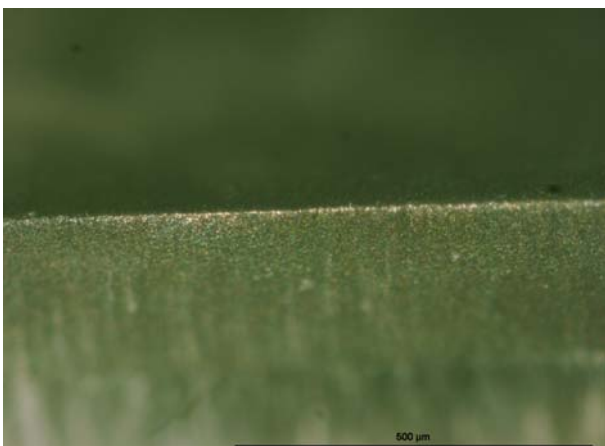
Laser polished cutting edge (cutting edge viewed at 45°)
